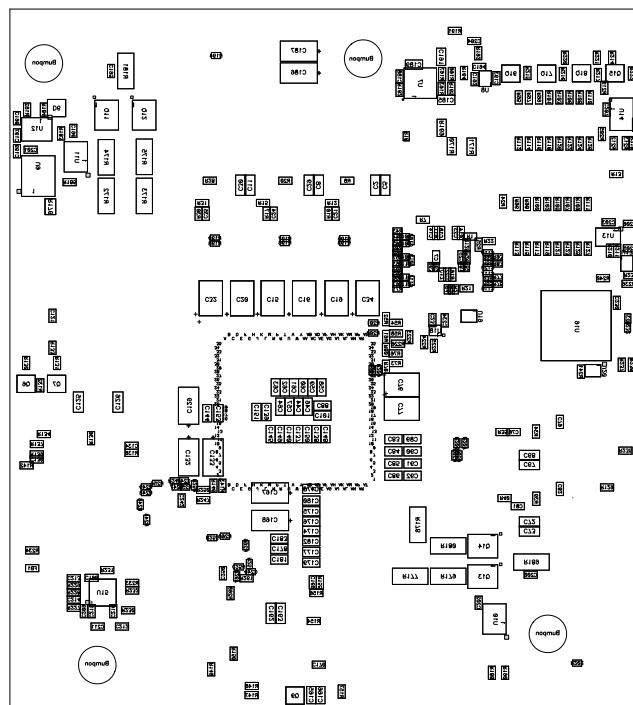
TPS59650EVM-753 Bottom Assembly Drawing (Bottom view)
